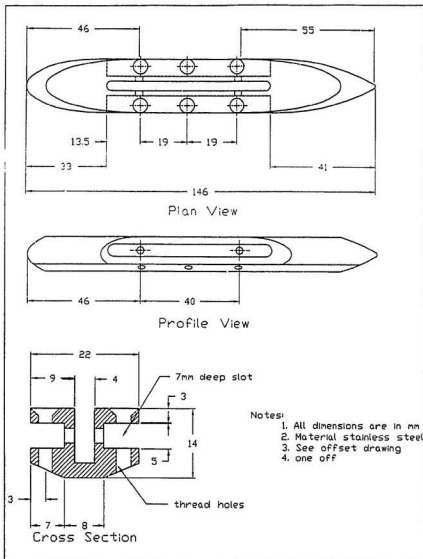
Design drawing of the mounting pod. Part number 2.
